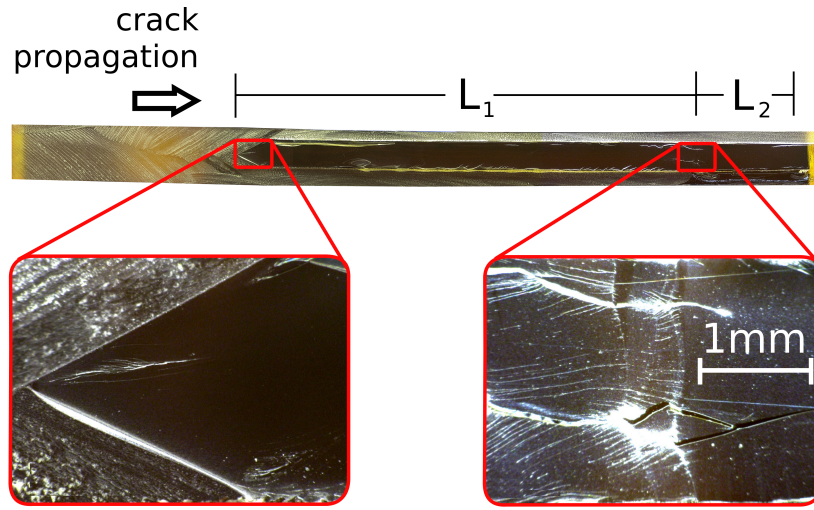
Microscopy image of RTM6 specimen fracture surface. Left detail: Start of brittle fracture, with smooth fracture surface at notch tip. Right detail: End of first and start of second macroscopic fracture event.
